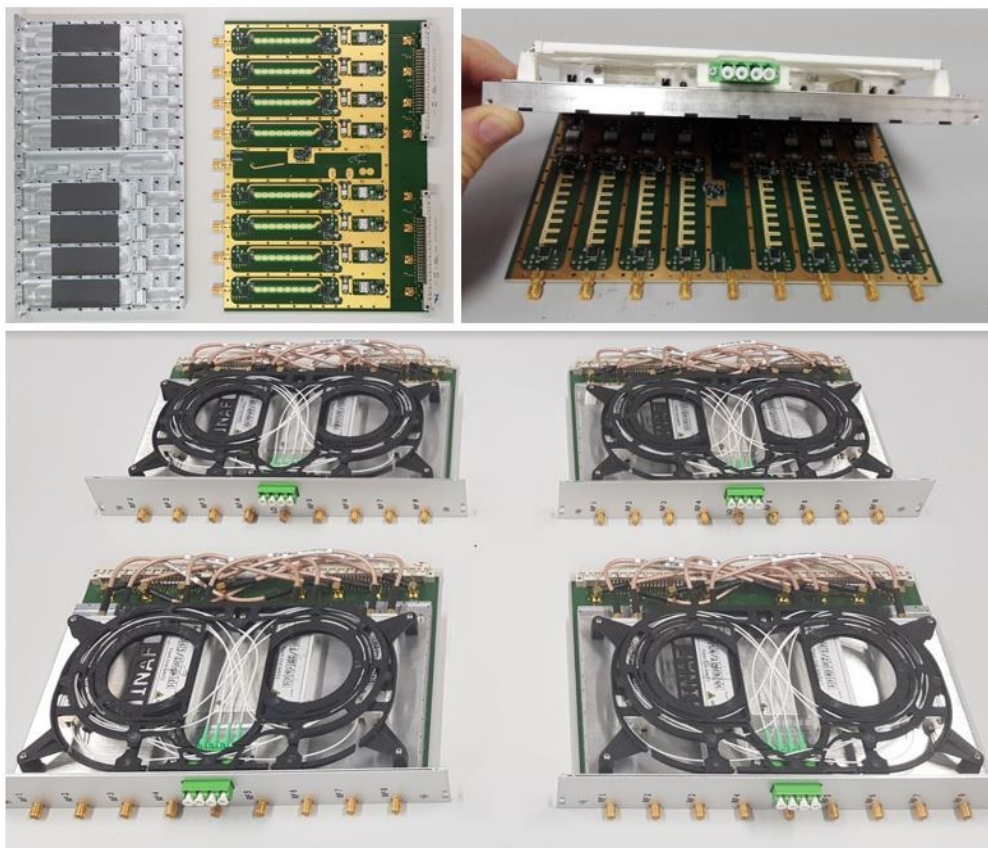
Photos of the WS RF/IF module. Top left: mechanical housing (left) and fabricated PCB (right) before assembly. Microwave absorbers are glued in the pockets of the PCB mechanical housing. Top right: PCB board (first prototype version) and mechanical housing during assembly with optical transmitters. Bottom: Four WS RF/IF modules fully assembled, with OTXs.
